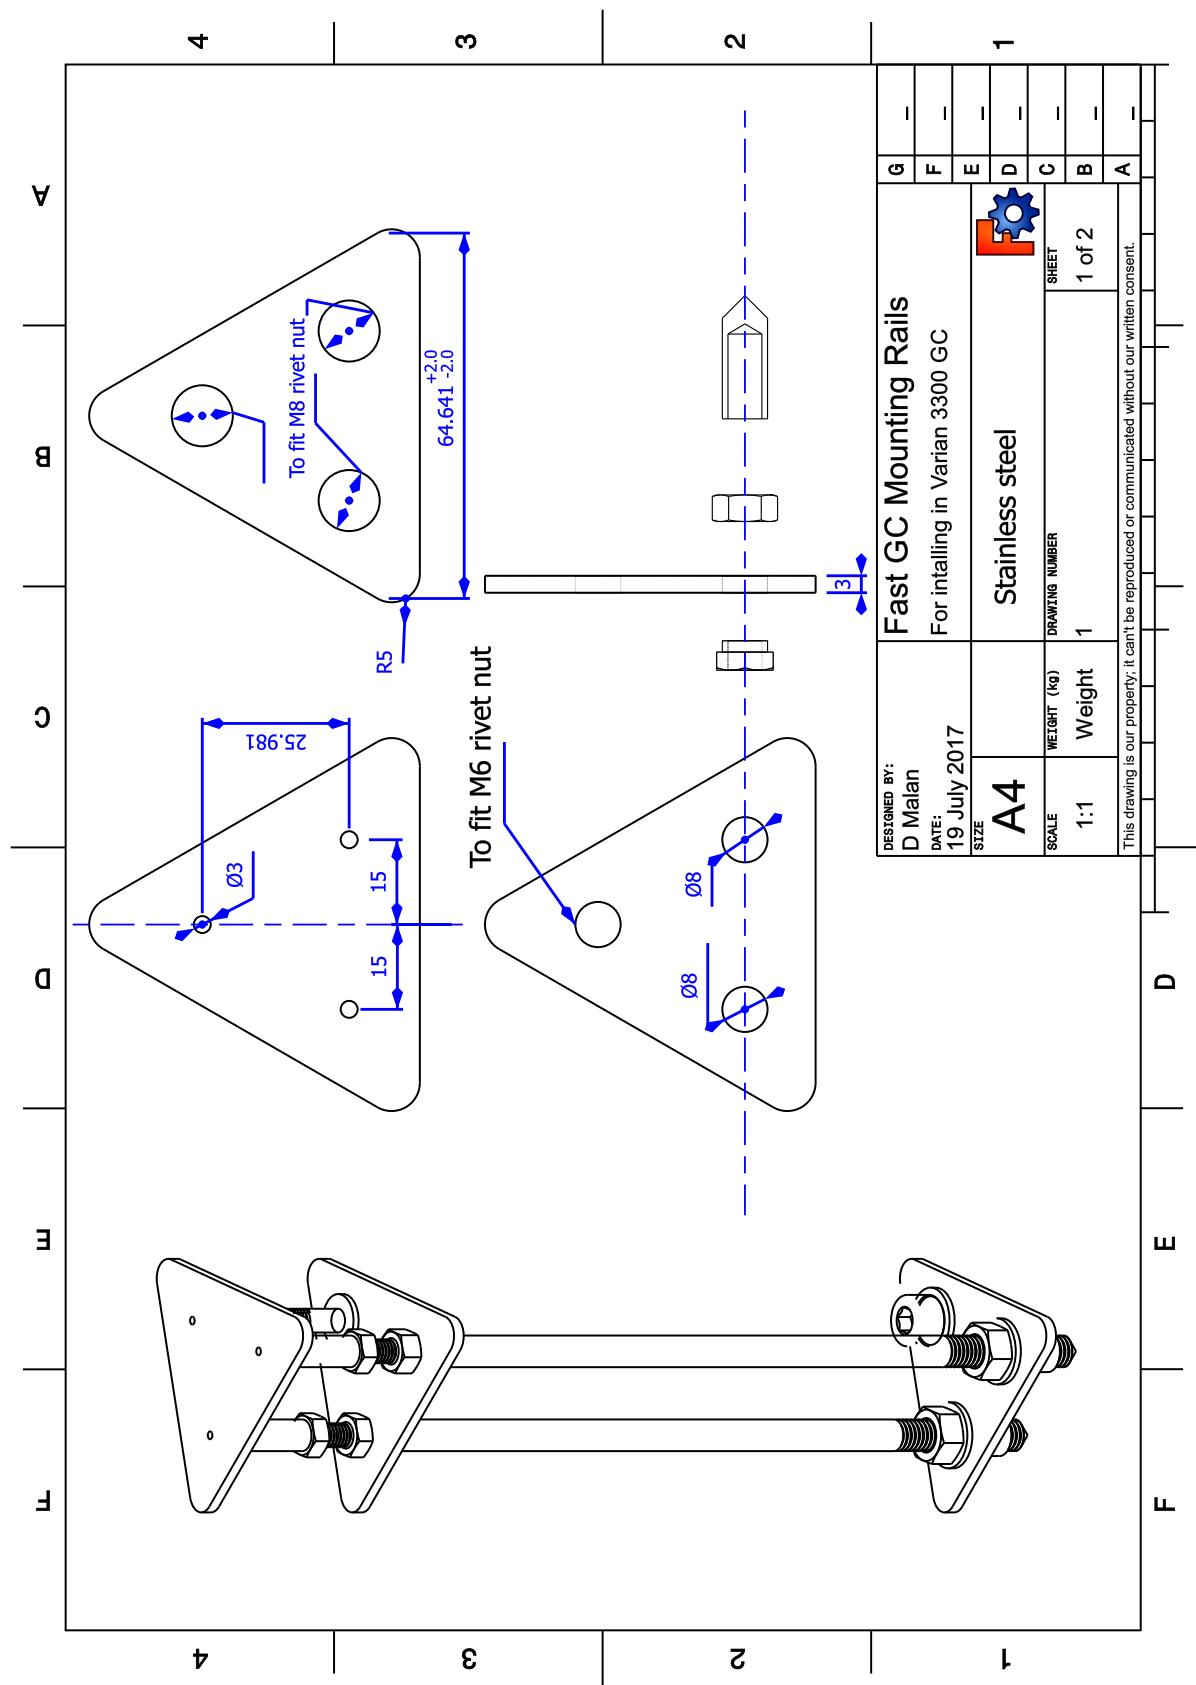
A technical drawing of the rails carrying the T-piece mounting block.
